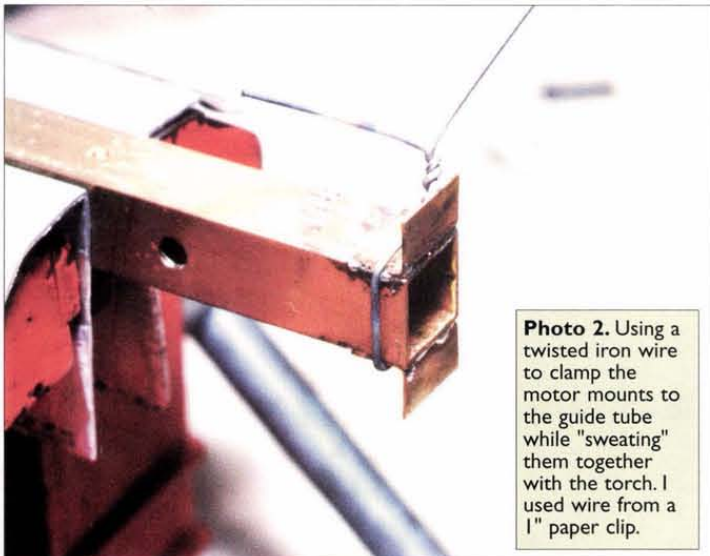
Using a twisted iron wire to clamp the motor mounts to the guide tube while "sweating" them together with the torch. I used wire from a 1" paper clip.
